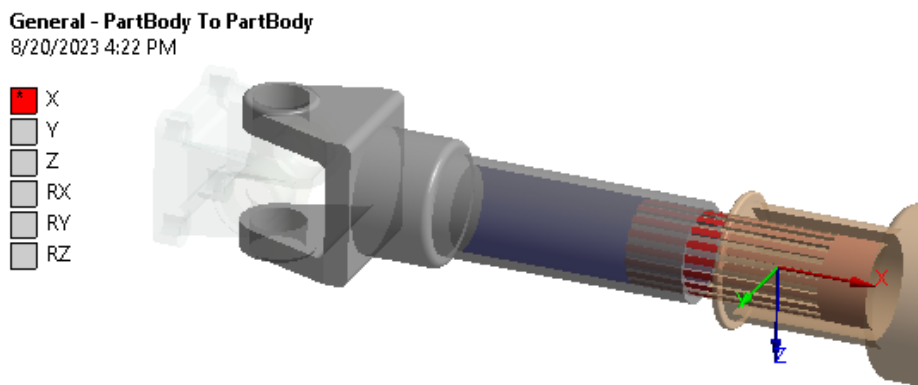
Translational joint between the slip yoke and the drive shaft
